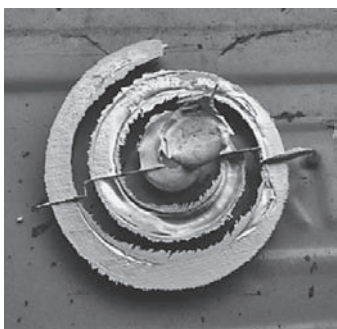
Casting after the first casting with ZrO<sub>2</sub> coating
